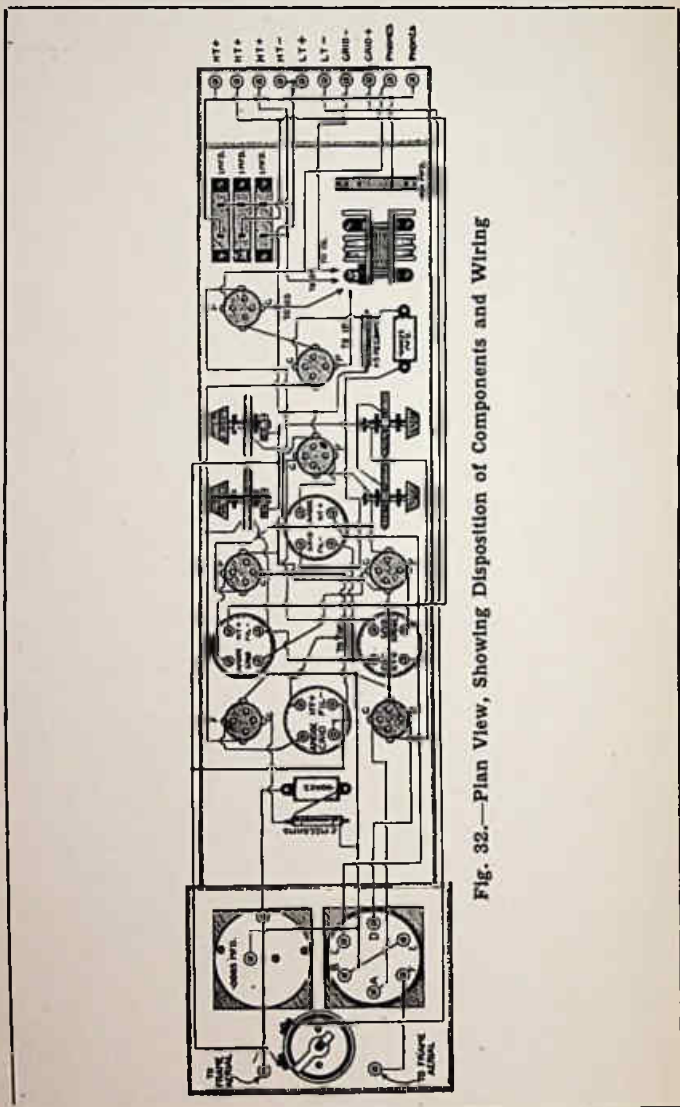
Plan View, Showing Disposition of Components and Wiring
